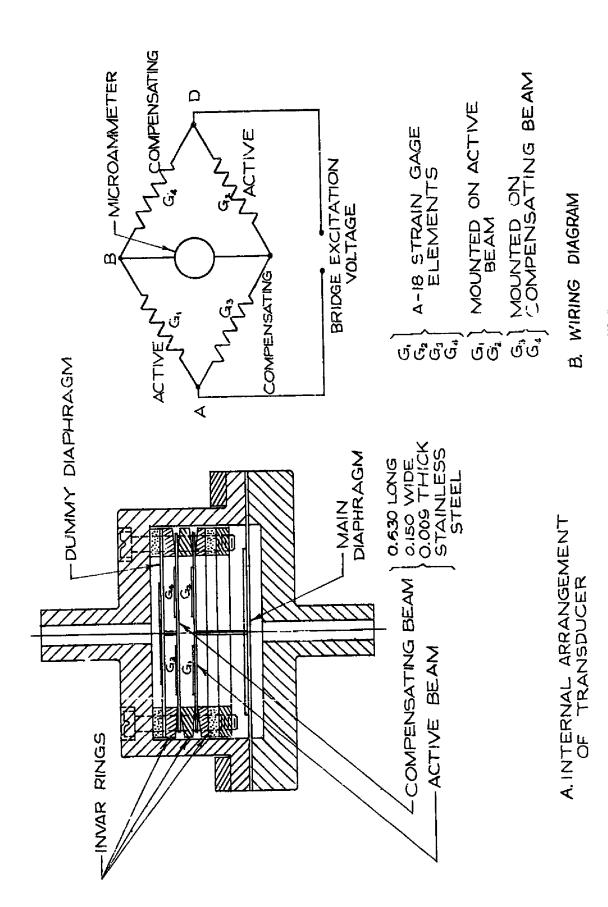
4-ARM BRIDGE ARRANGEMENT
